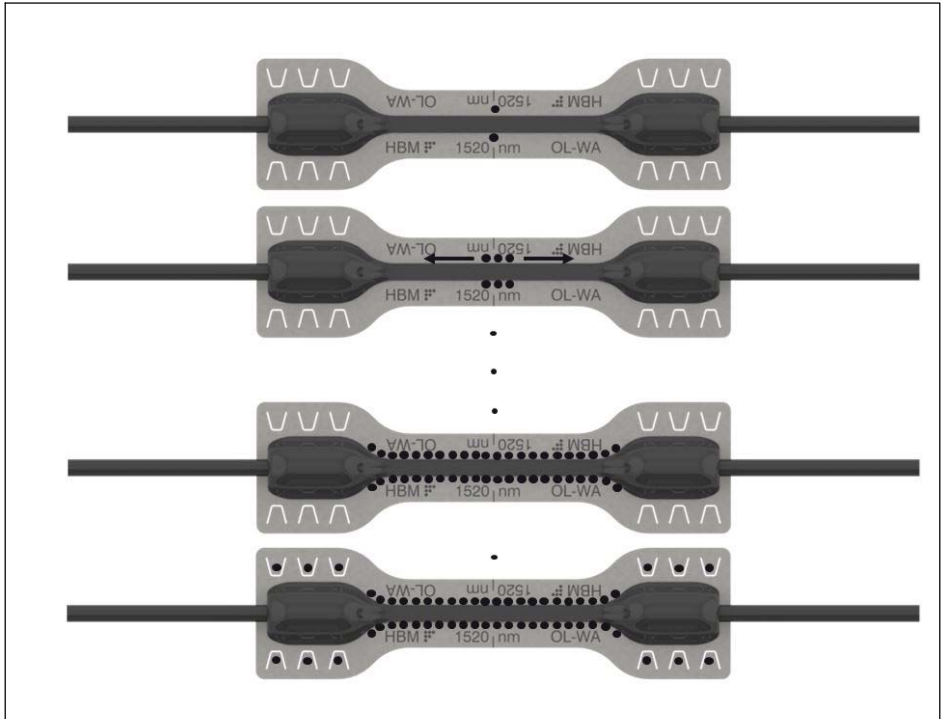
Setting welding spots onto OL-WA.
